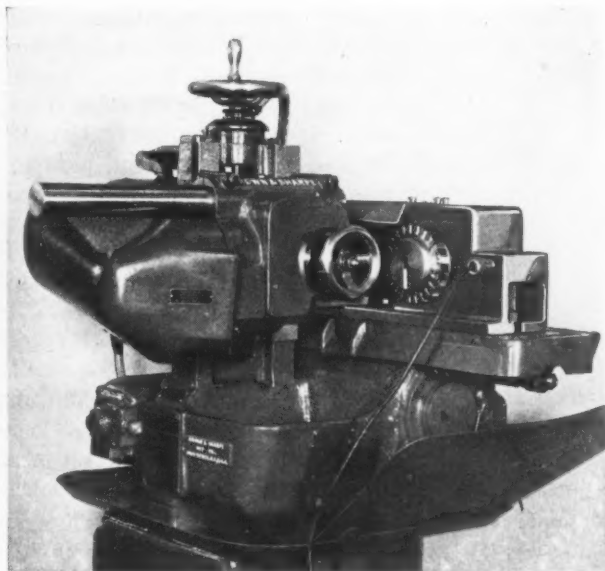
Rear View of Indexing Fixture Shown in Fig. 4
